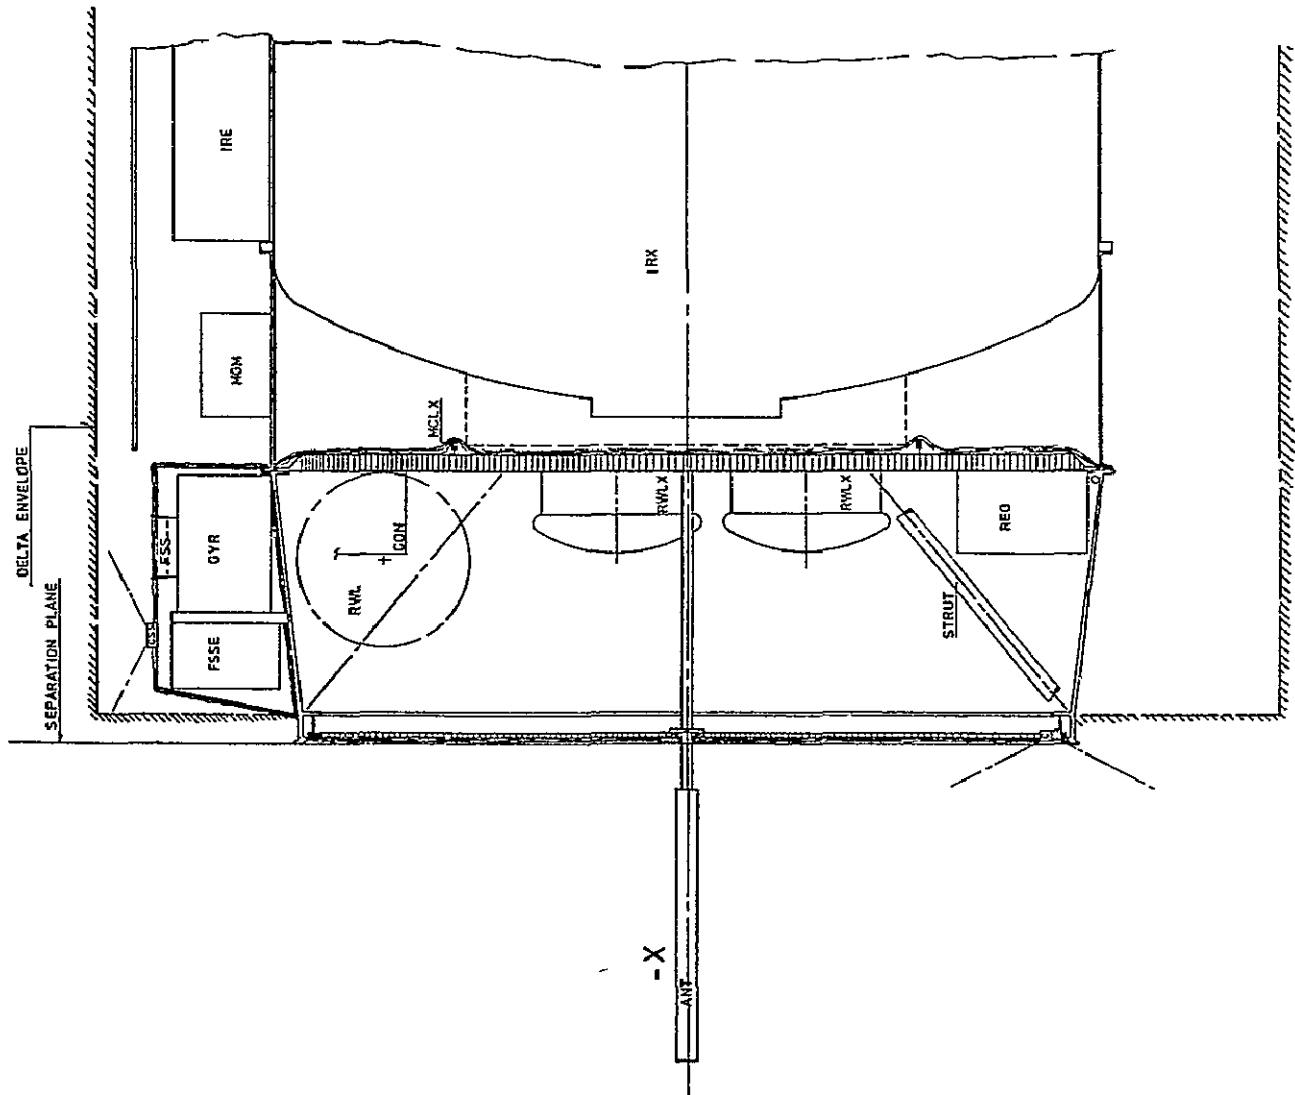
LAYOUT SPACECRAFT UNITS SIDE VIEW
